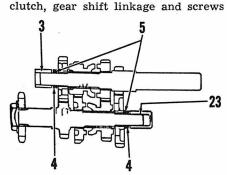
On four speed transmissions, fourth pinion and first gear shims (5) should be installed next to gears with thrust washers (4) against bushings.
